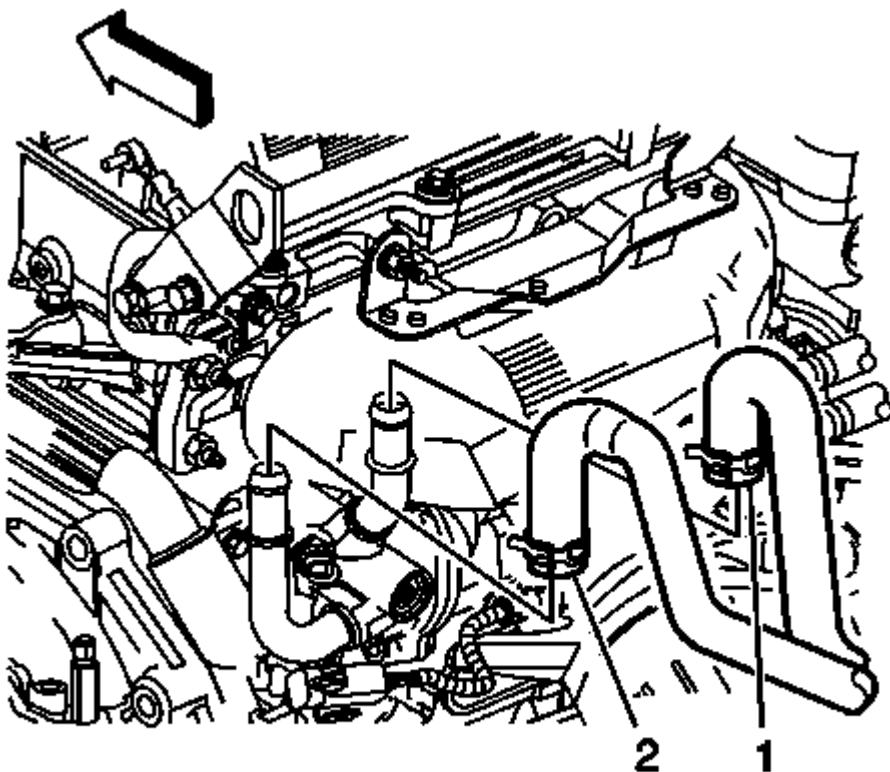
View Of Inlet & Outlet Hose Clamps At Thermostat Housing Pipes
